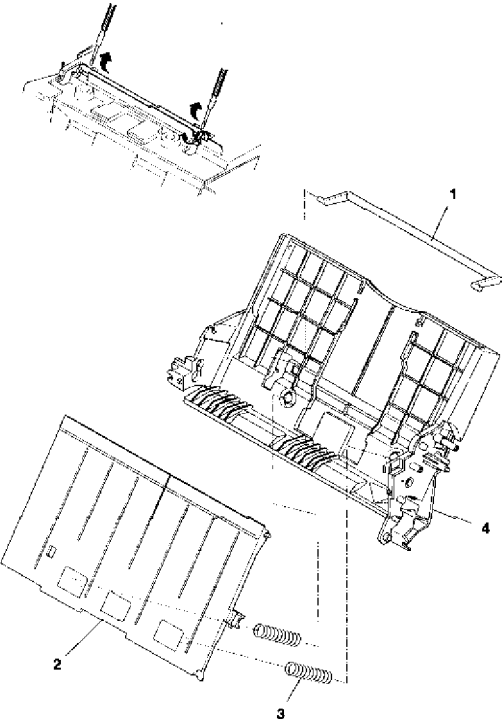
CUT SHEET FEEDER PART (1)FIGURE 16 CUT SHEET FEEDER PART (2)
